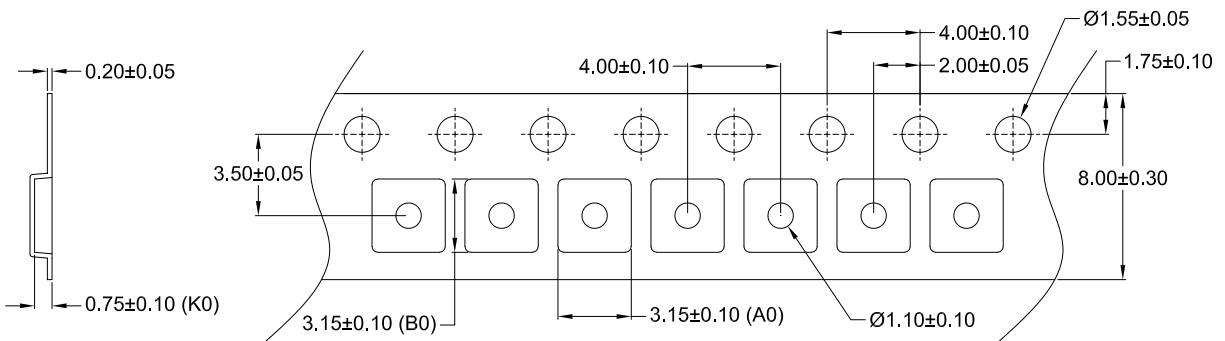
Pocket tape dimensions for LUXEON 3030 HE Plus – Deep Dimming.
